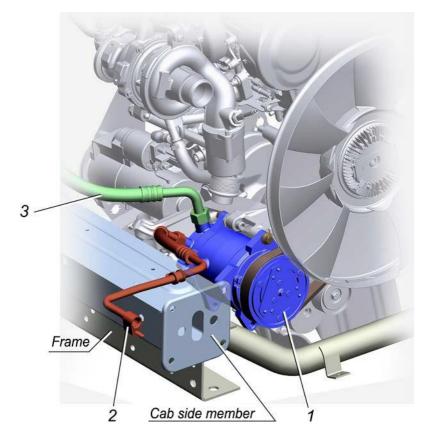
Compressor installation: 1 – compressor; 2 – compressor outlet pipeline; 3 – compressor inlet pipeline;
